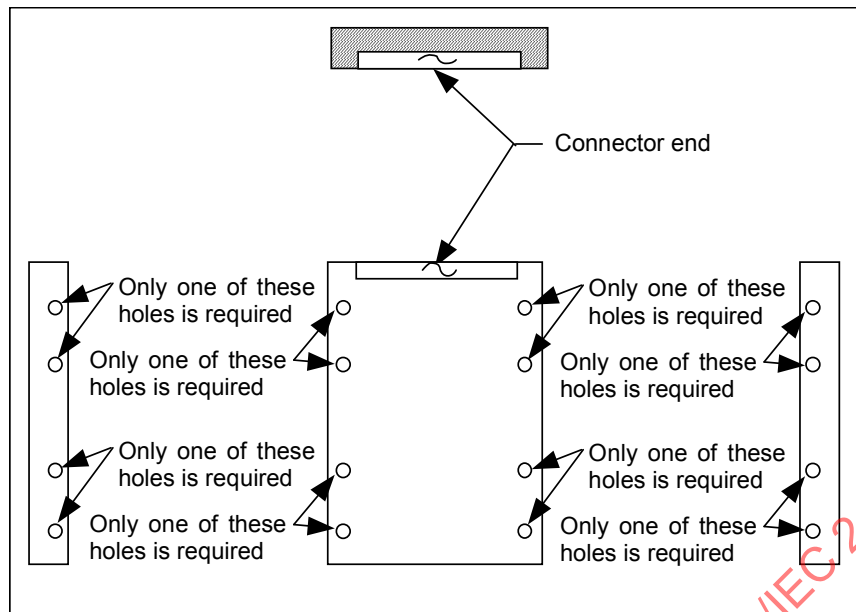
65 mm (2.5 in) form factor mounting holes
